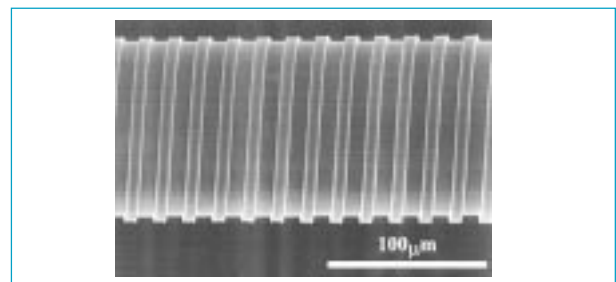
Example of a screw fabricated by fine cutting (Courtesy of Dr. Y. Yamagata and Prof. T. Higuchi)
